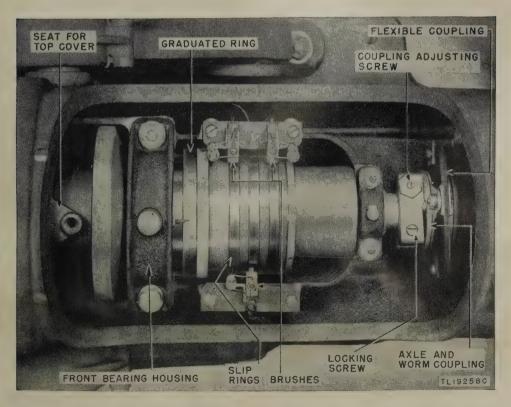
Bearing Indicator BC-1159-A, demagnetizing and goniometer adjustments.
